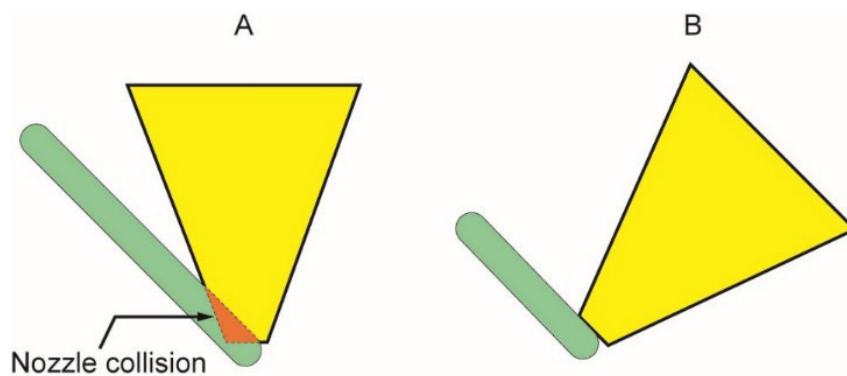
Nozzle colliding with extruded filament as printing angle gets higher.
